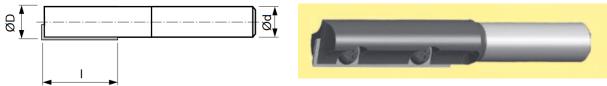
End mill used in the experiment - KARNED 4451 (ØD - working average, 1 - working length, Ød - clamping diameter).
